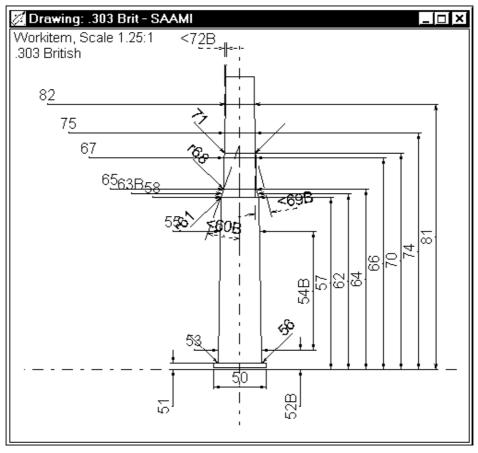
Chamber Outline Drawing with Metrics and Dimensions
